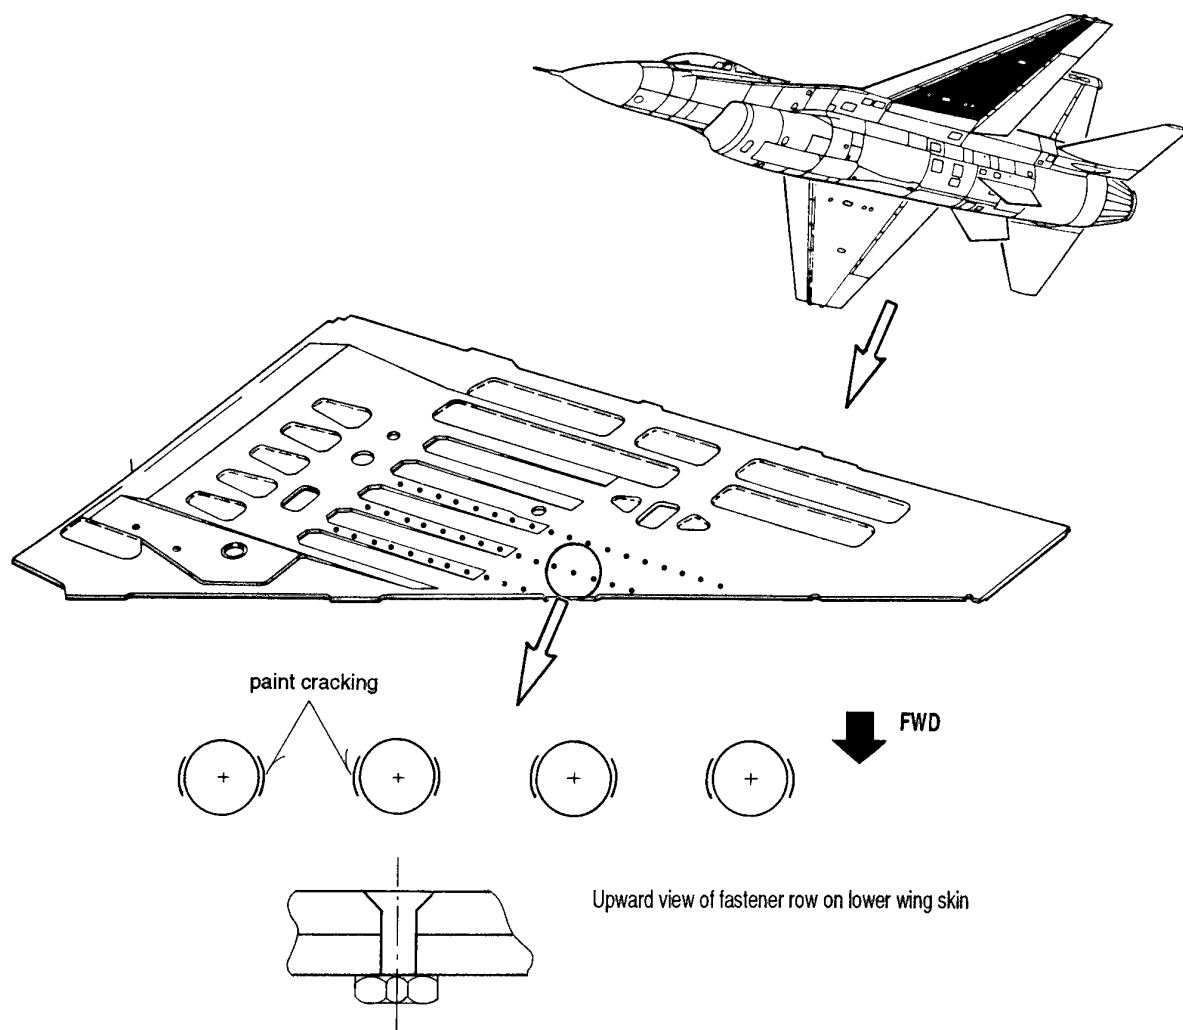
Paint cracking in highly loaded components attributed to tilting of the fasteners due to shear load transfer
